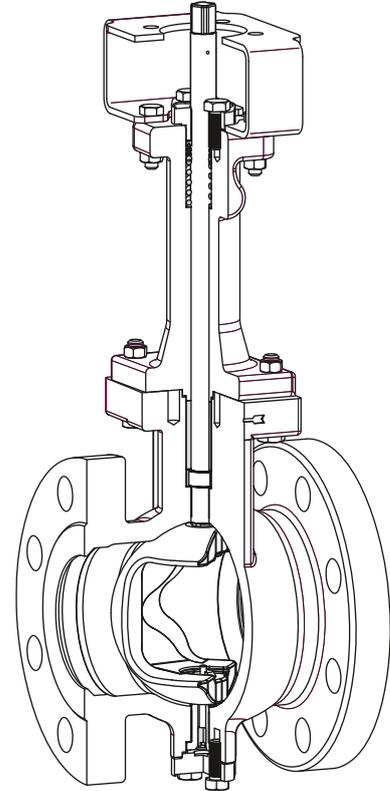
Insulating section for Spraytech Segmented / (V-Notch) Ball Valve
